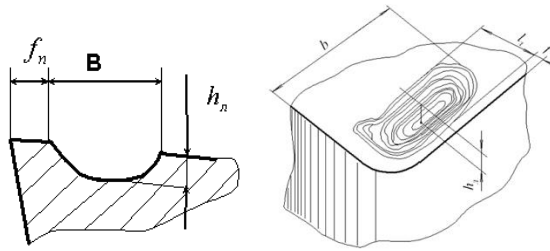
The front surface of the crater wear: B – width of the crater, h_n – the crater depth, f_n – bulkhead (the distance from the cutting edges to the crater) width, l_n – crater width [14].
